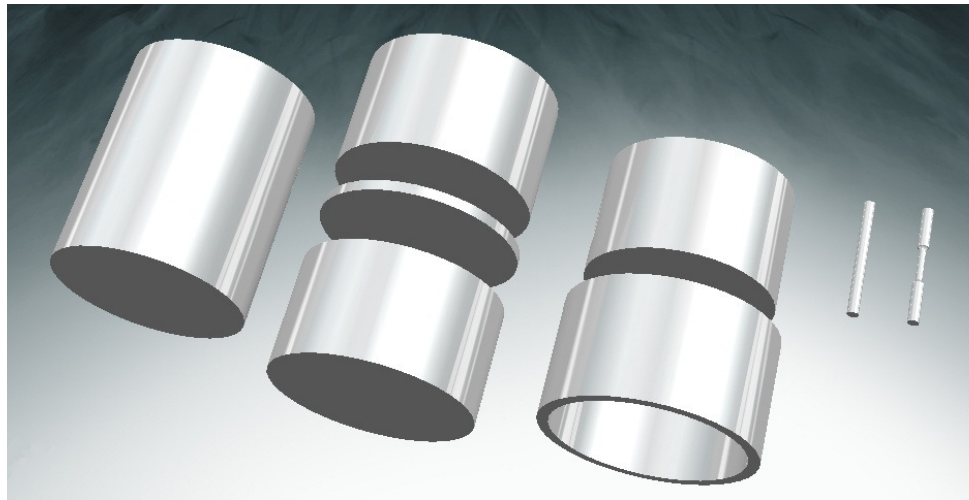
Cast block, cut block, removed outer shell, cylindrical milling specimen and turned tensile specimen.
